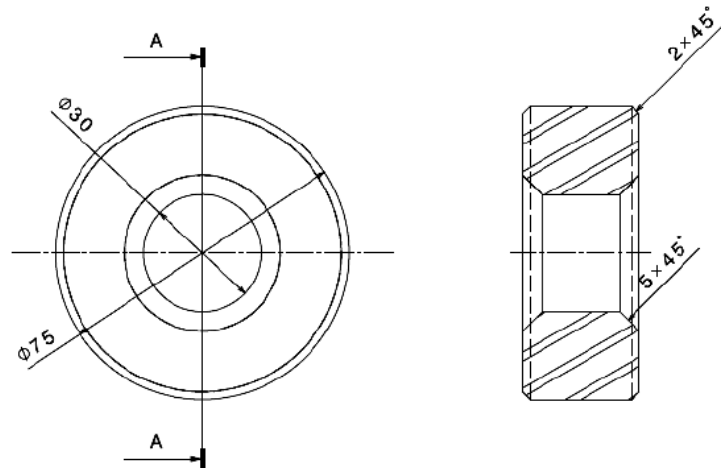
Dimensions of the test specimen, in millimetres [mm].
